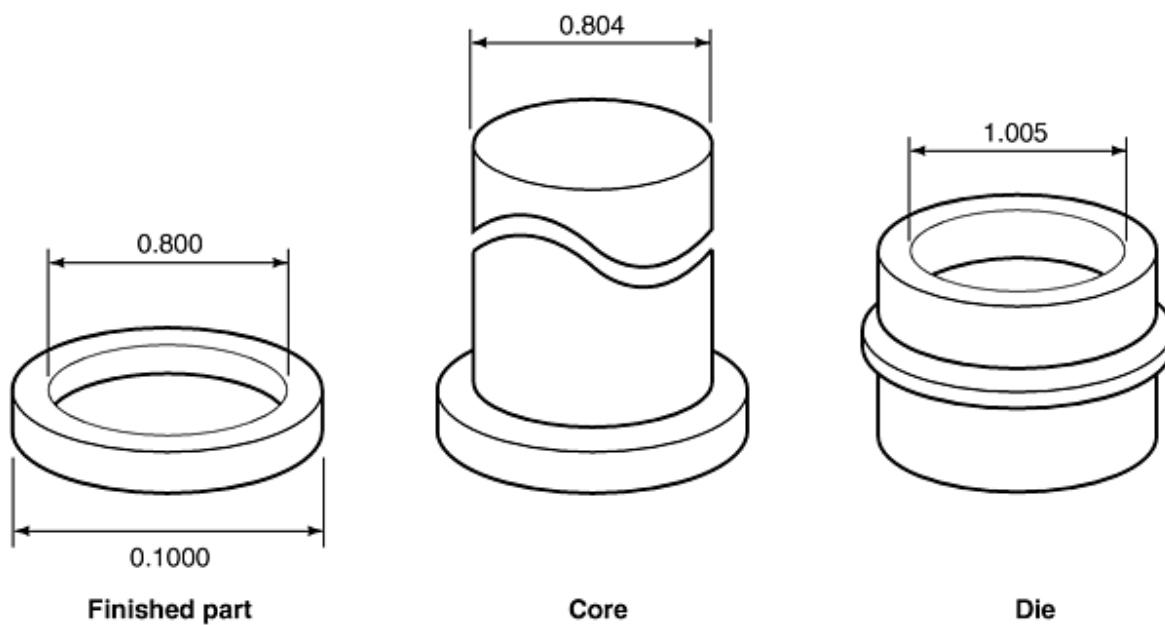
Example of using tooling factor for die sizing. Factor used: 1.005; tooling not shown: upper punch, lower punch, various adapters, and so forth
